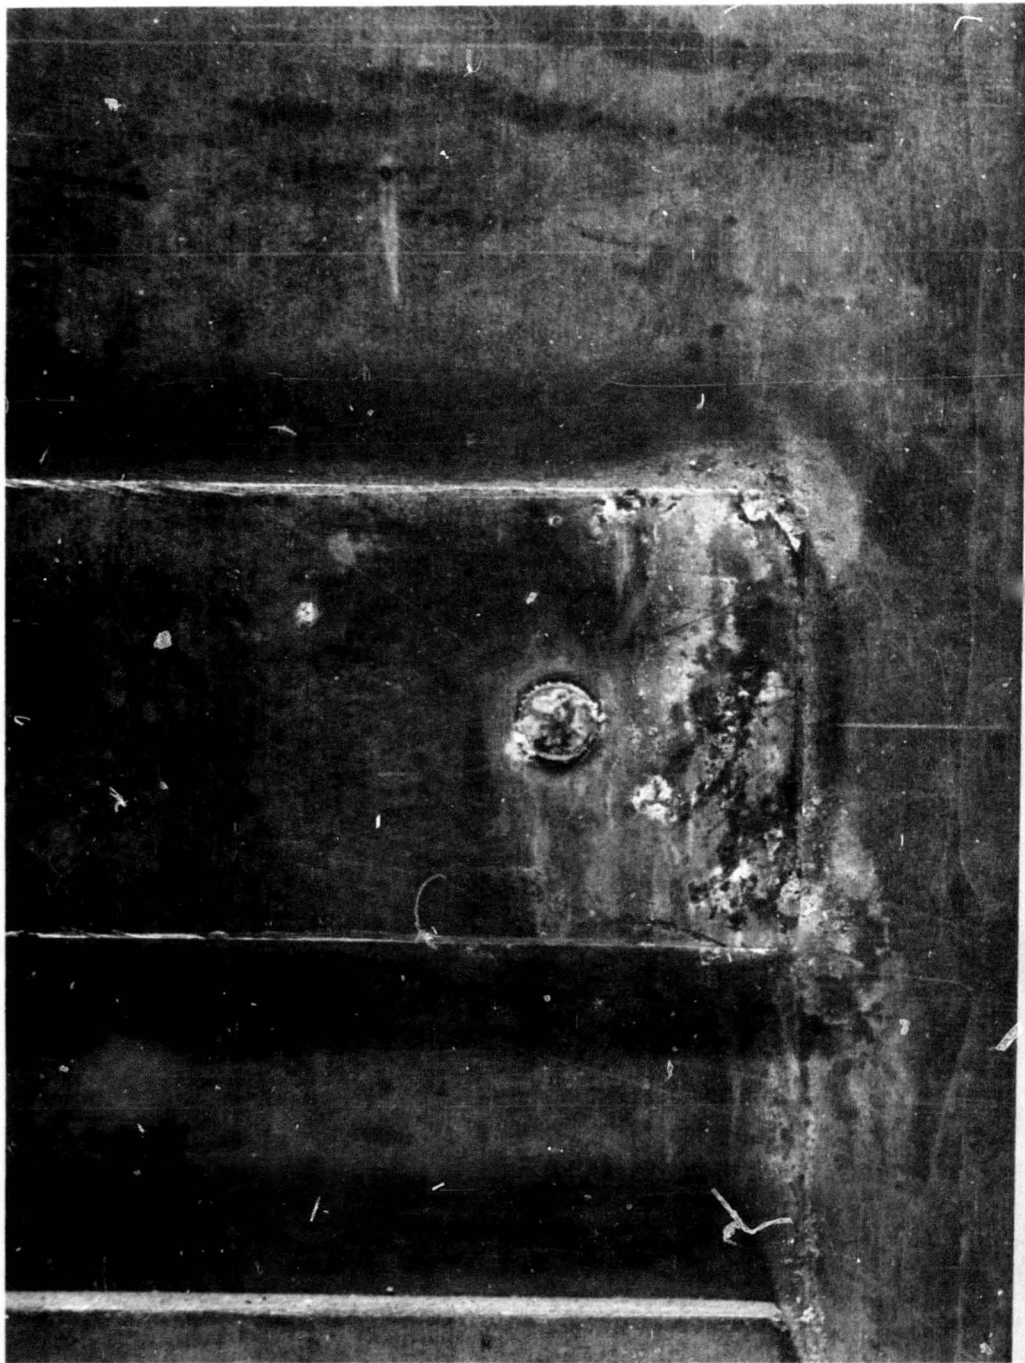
Arrested pitting on anodized 6061-T6 strip. Initiated by contact with steel vessel.
